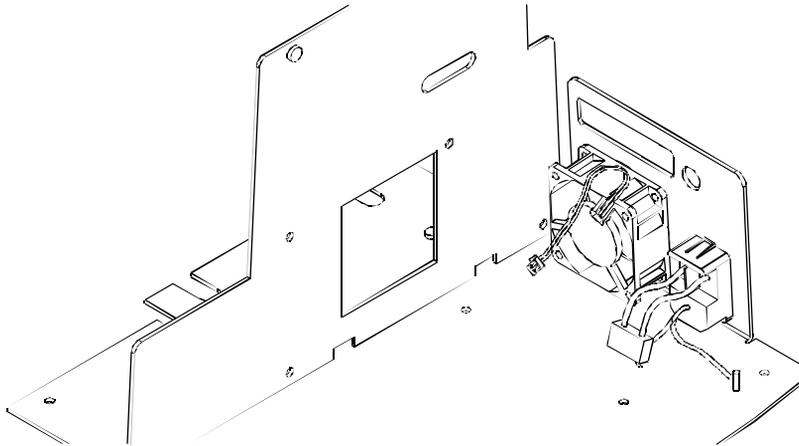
Cooling Fan/AC Entry Module Removal.
